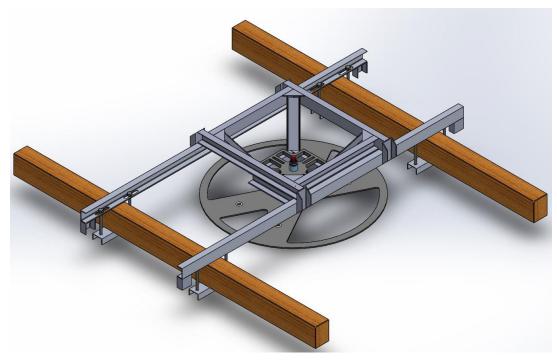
D CAD model of the Suspension and Rotation Framework Assembly(ISO View)
